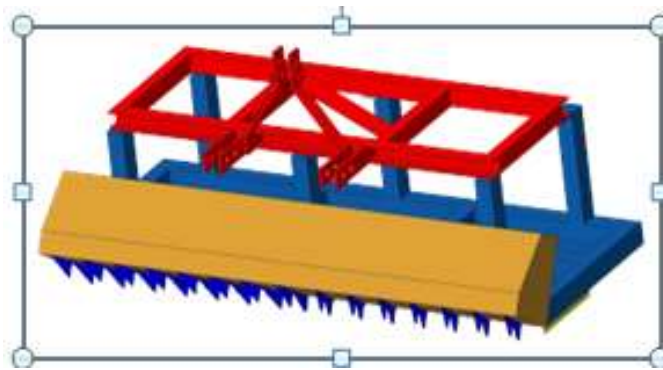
Isometric view of mini- tractor mounted clod crusher
